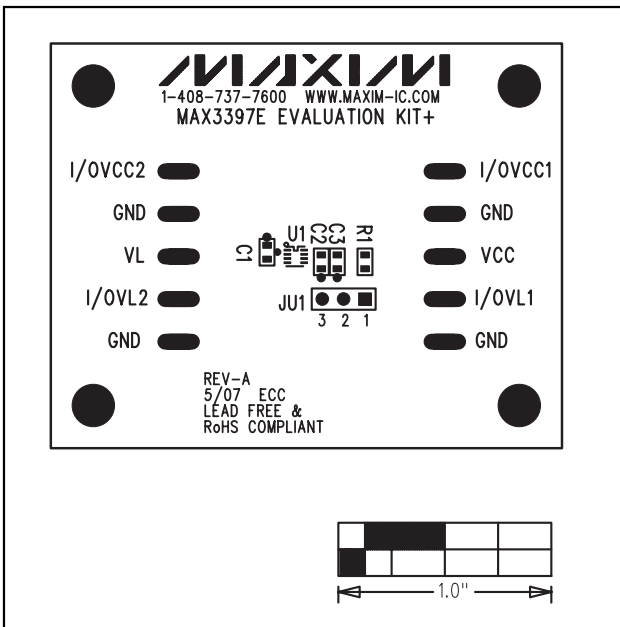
MAX3397E EV Kit Component Placement Guide—Component Side
